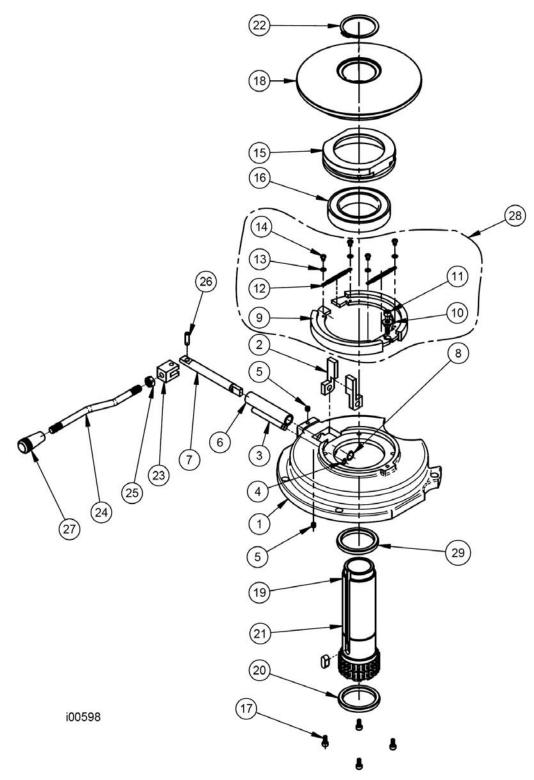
Lower Vari-Disc Sub-Assembly P/N: 20697-5 (assembly not available, order parts separately)
